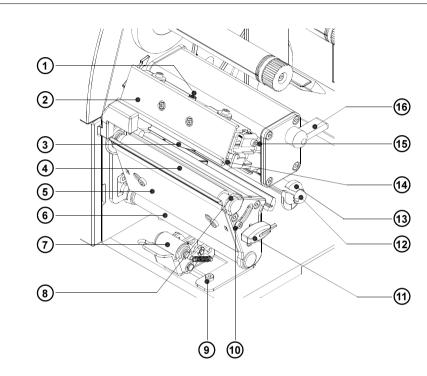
Print mechanism M4/200P, M4/300P with printhead open
